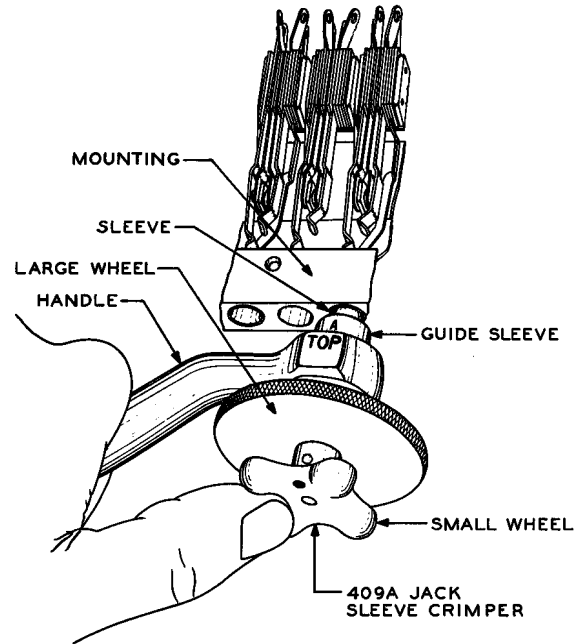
Method of Crimping Sleeve Terminal With 409A Jack Sleeve Crimper
